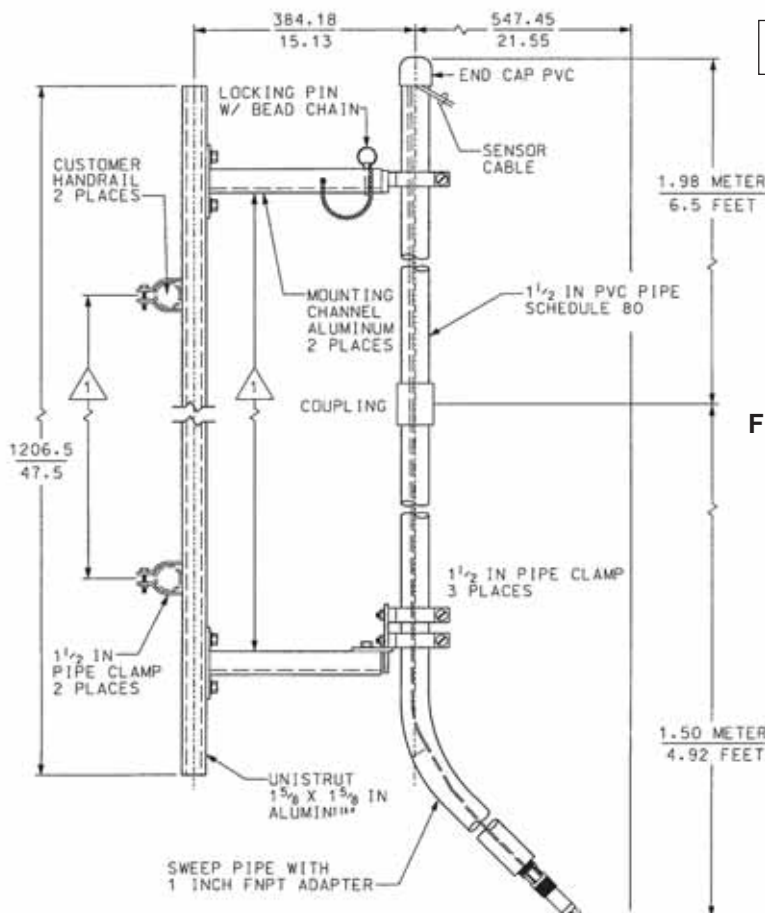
Submersion Installation Using the Handrail Mounting Assembly (PN 11275-01)
